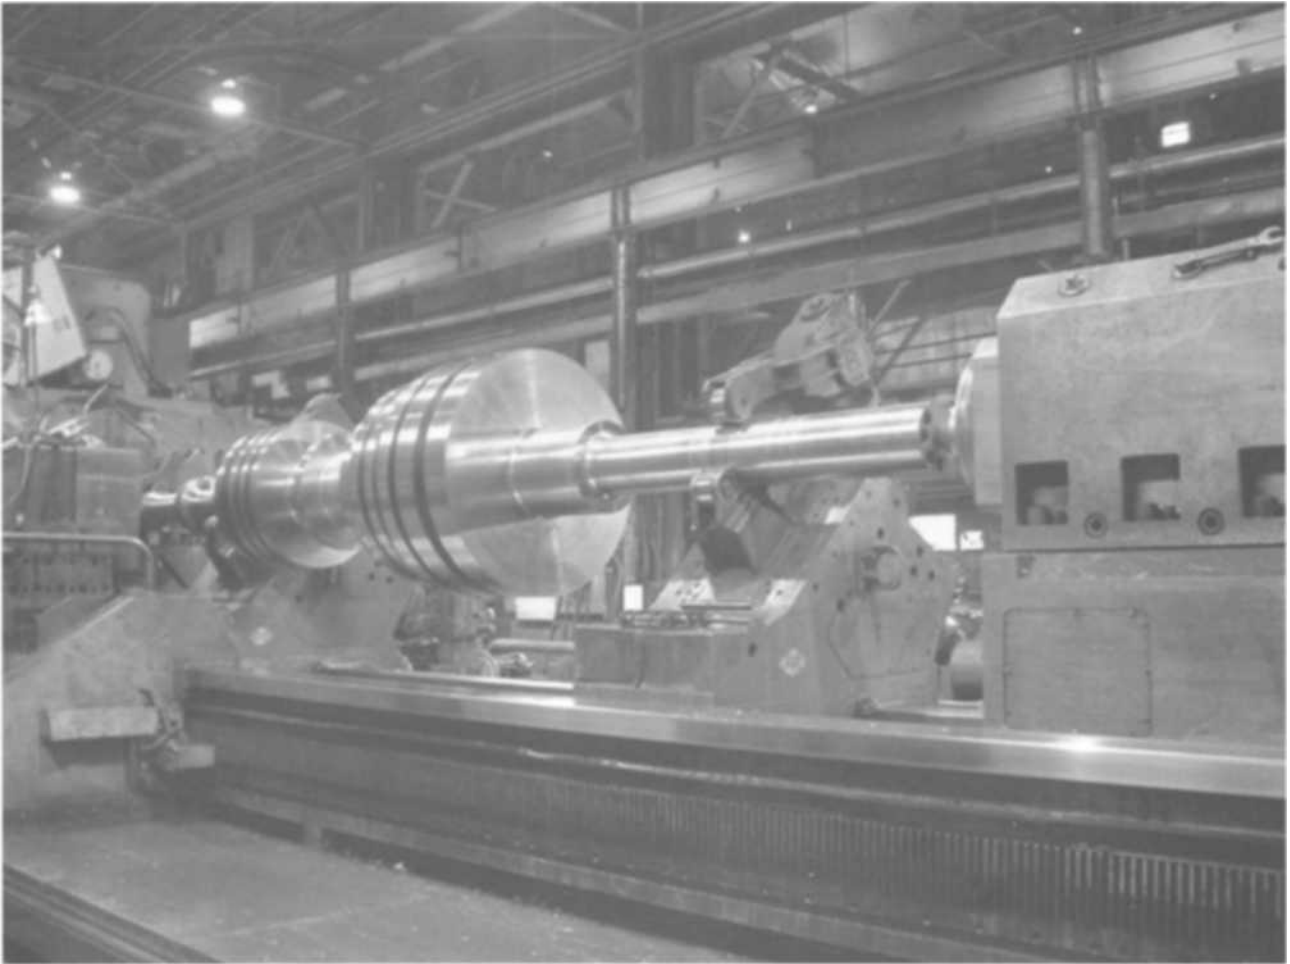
A large steam turbine rotor forging in a lathe used for turning the rotor journals and gashing the blade wheels. Some idea of size can be gained from the size of the mechanical test core holes in the end of the shaft portion. The test cores themselves are about 1 inch (25 mm) in diameter and the holes left by the trepanning tool are over $1\frac{3}{4}$ in. (45 mm) in diameter. Lathes of this type have high kWh power ratings. (Courtesy of Ellwood National Forge Company)
